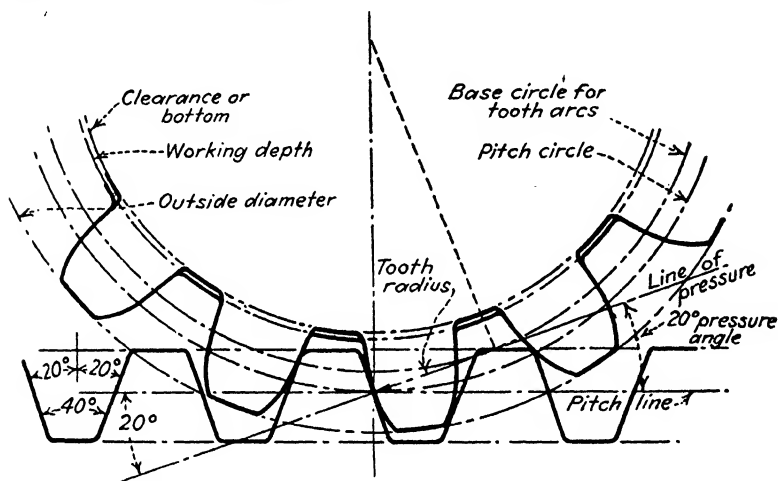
Action of 20-deg. stub-tooth gear and rack.
